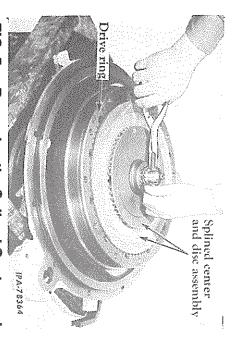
Removing the Splined Center and Disc Assembly Snap Ring
